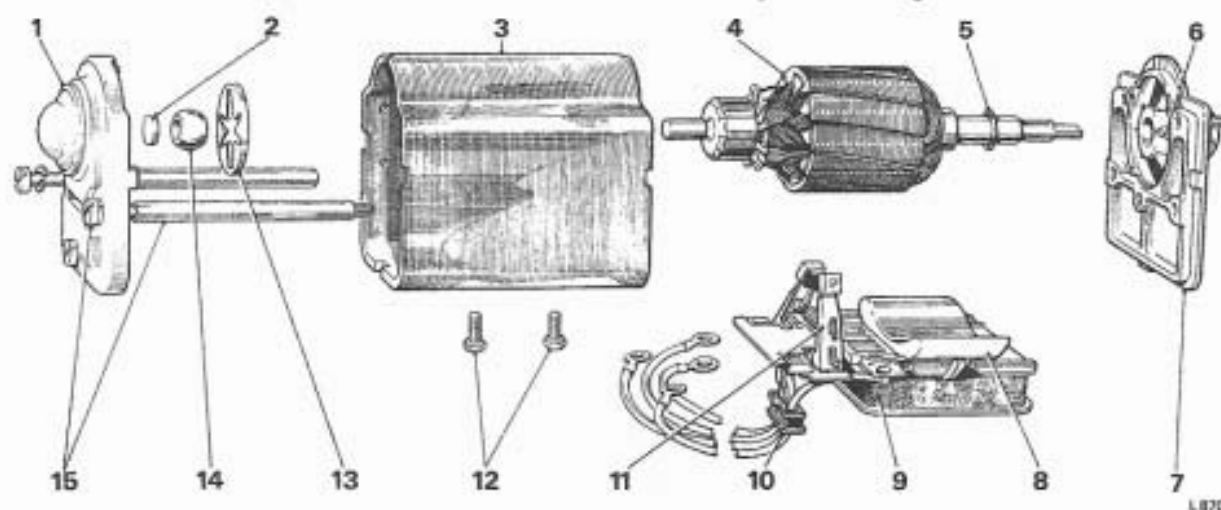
GEARCHANGE ACTUATOR MOTOR
